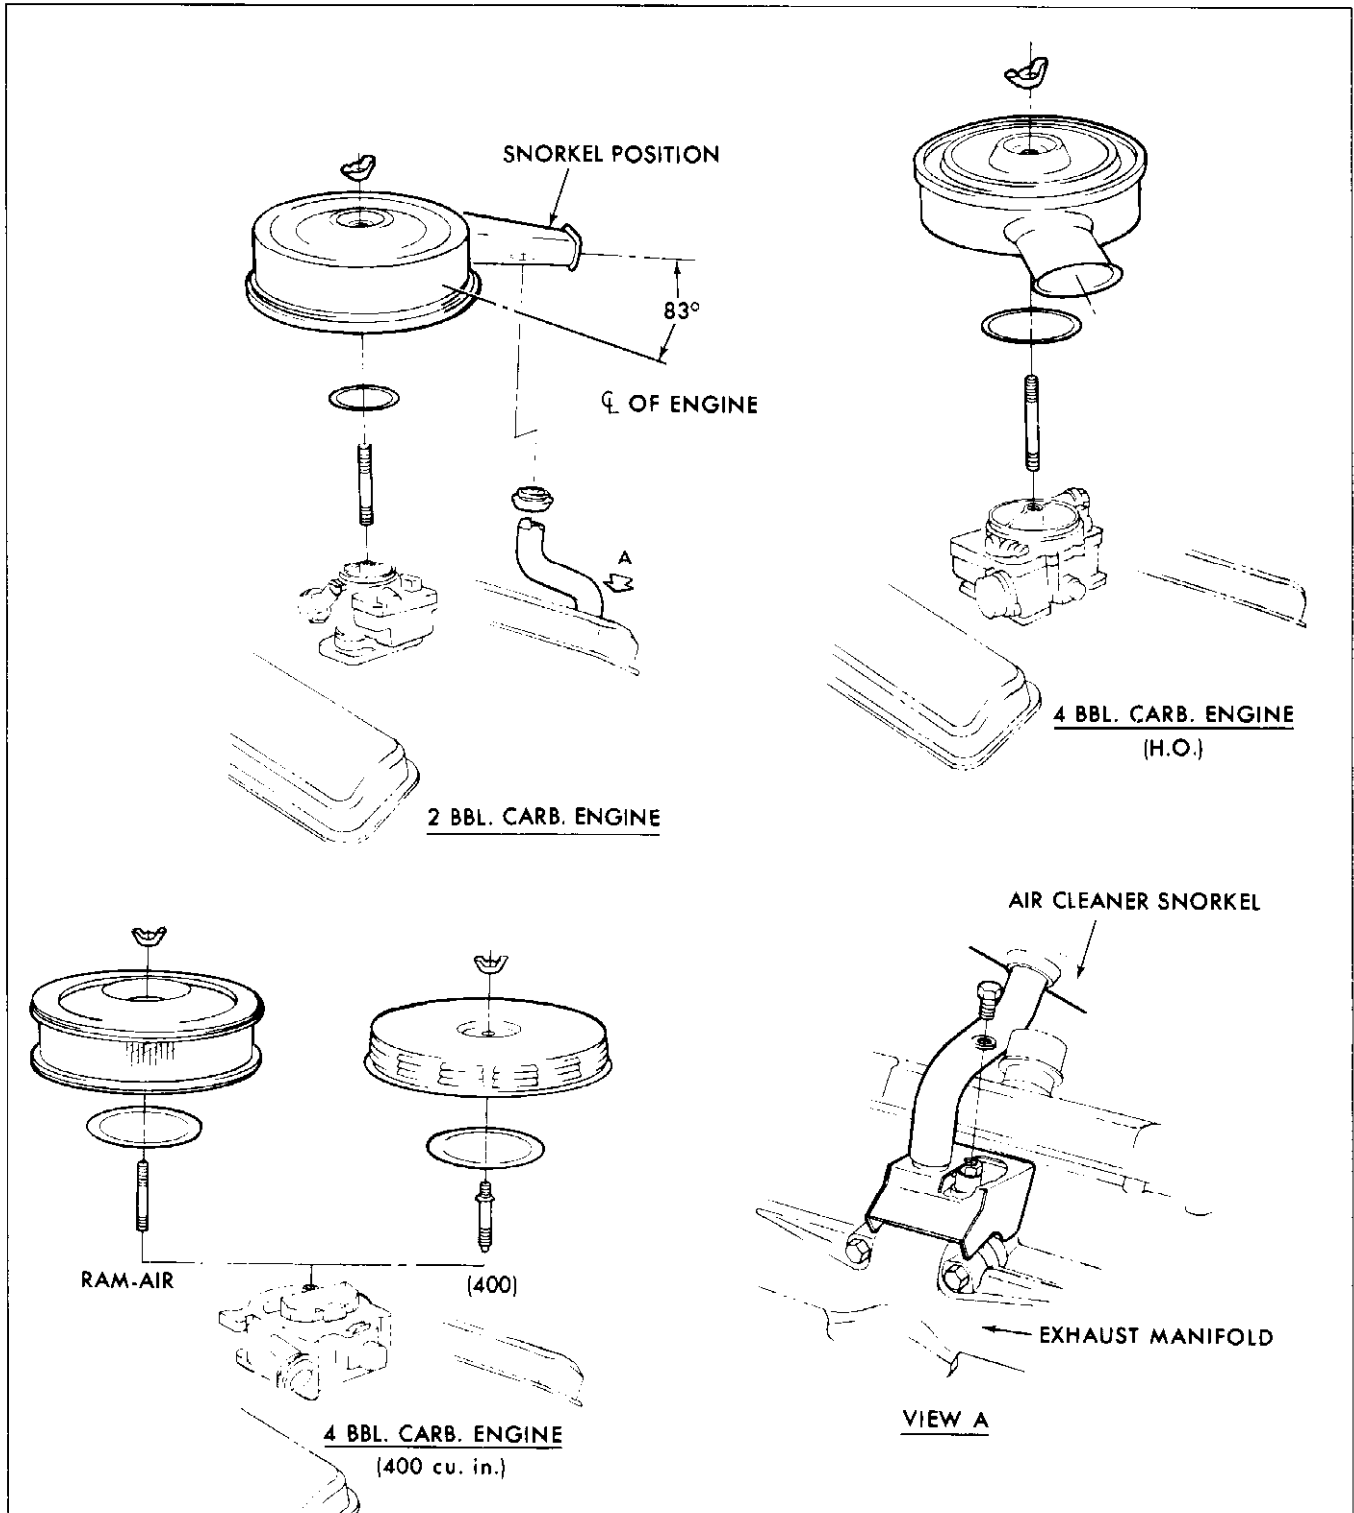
B-1 Air Cleaner and Heater Stove Assembly
